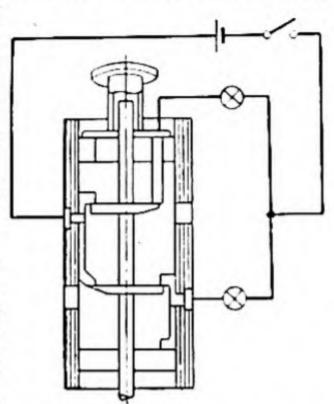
Checking contacts in one arc-control chamber for simultaneous closing and opening
